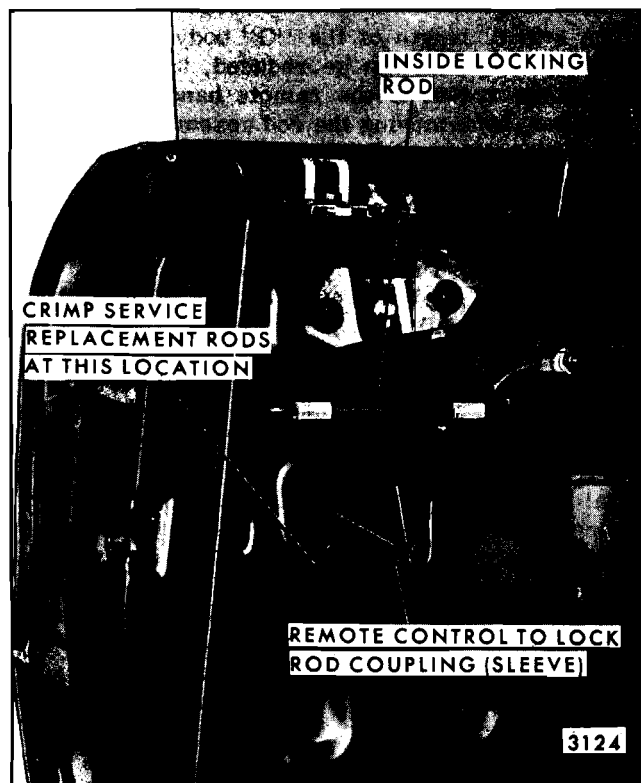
Front Door Inside Locking Rod - Coupe Styles
